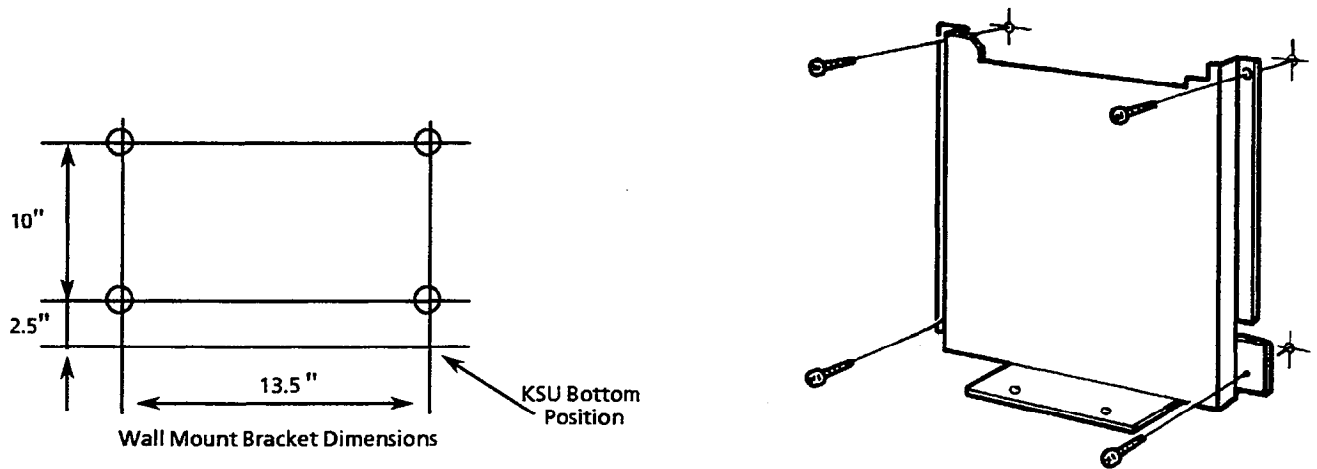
Attaching the Wall Mount Bracket of the Level II KSU to the Wall
